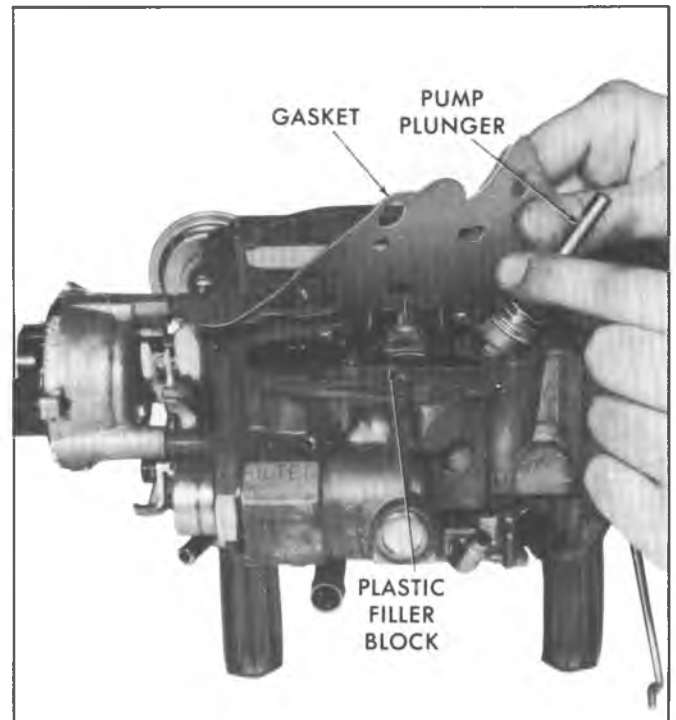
MQ—Removing Air Horn Gasket and Pump Plunger
